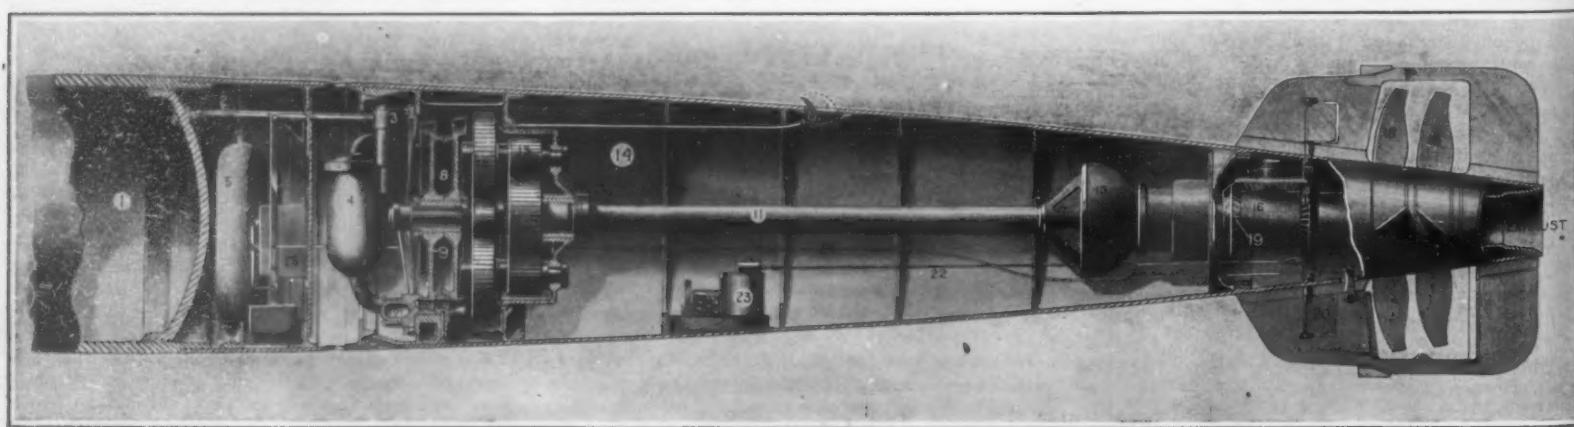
Detail of superheater, balanced turbine and reducing gear
